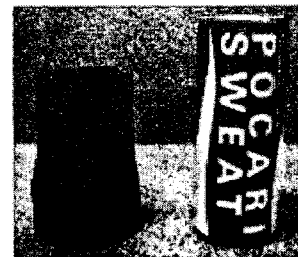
(a) Fabricated parts using VLM-ST(Extrude Cross)
